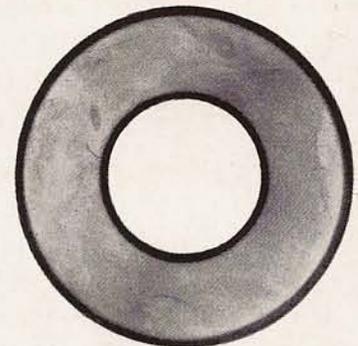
Cross Section of Headstock Spindle. Bearing Surfaces are Carburized and Hardened to a Depth of $\frac{3}{64}$ "
